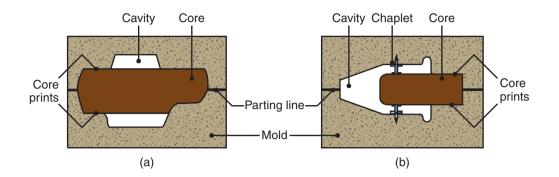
Examples of sand cores, showing core prints and chaplets to support the cores.
